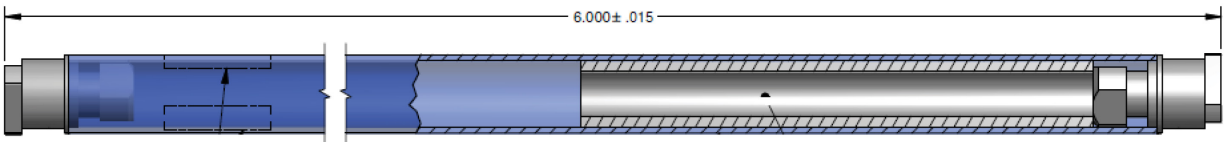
A schematic of the AFC-3A annular rodlet assembly.
